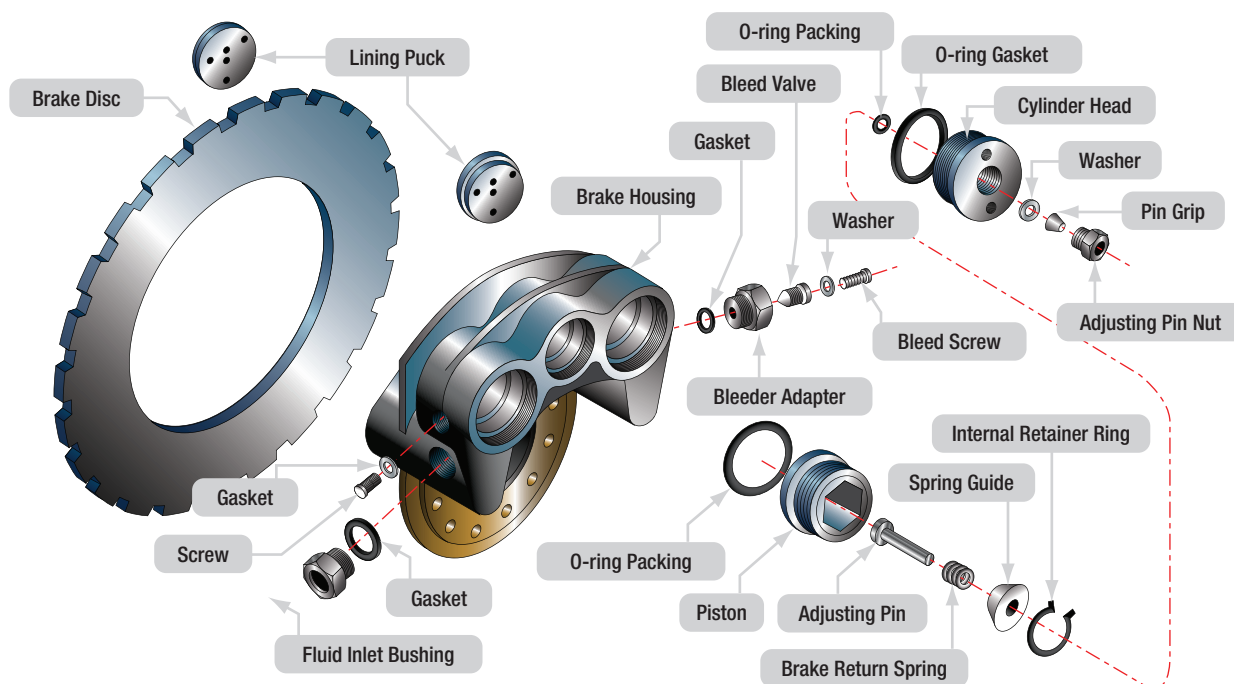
An exploded view of a single-disc brake assembly found on a light aircraft.
